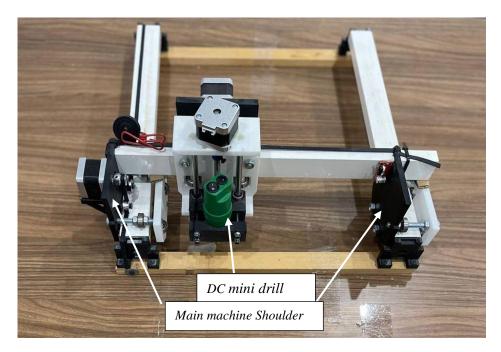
Assembled computer numerical controlled milling machine for printed circuit board Fabrication.
